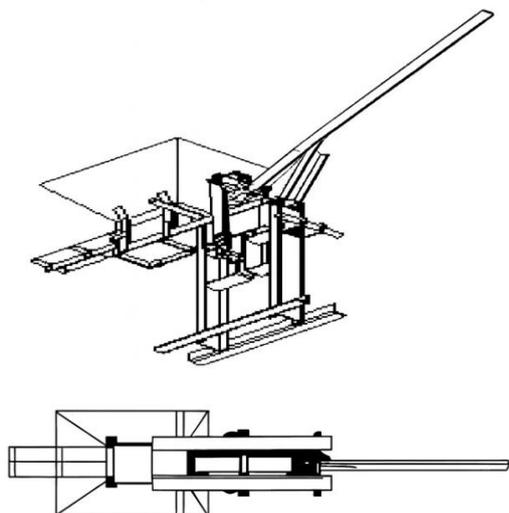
, 6. Top view highlighting mold cavity dimensions and hopper placement.
